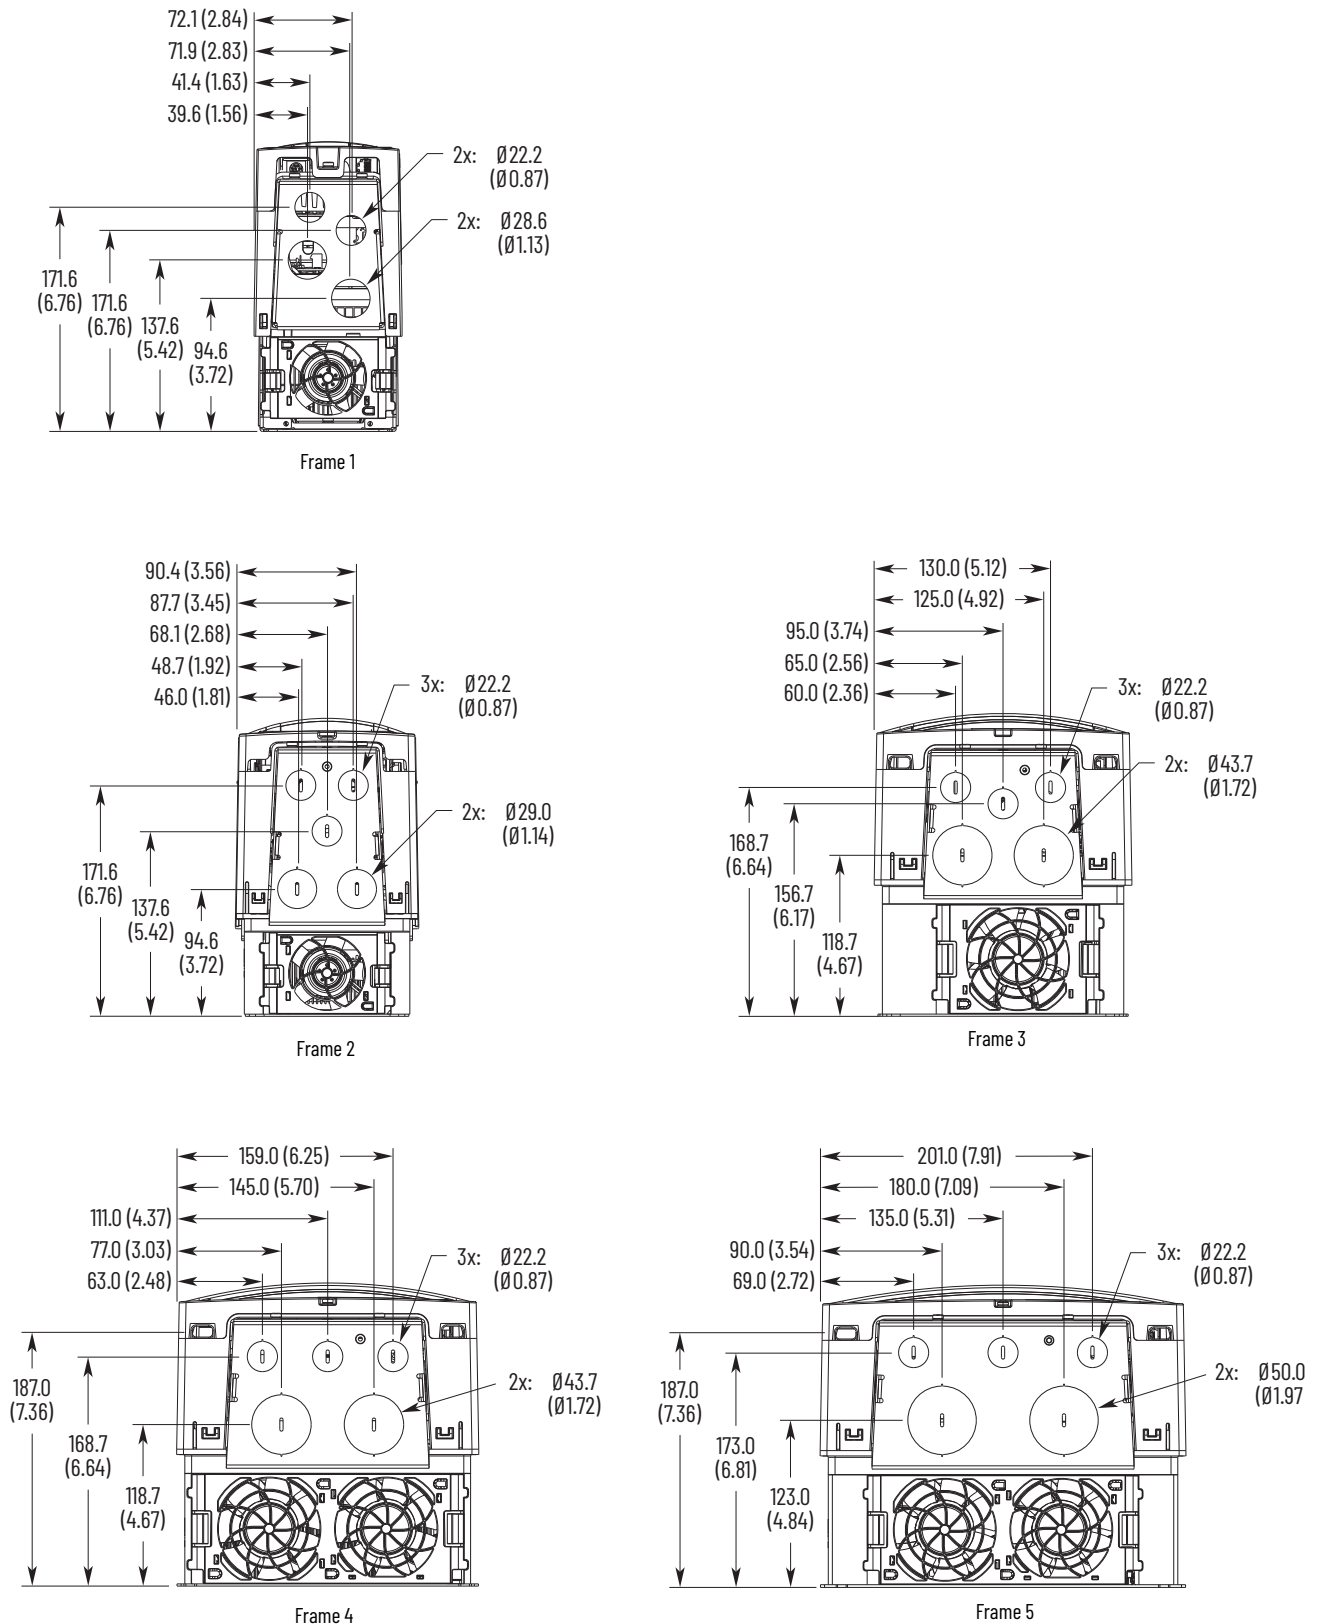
NEMA/UL Type 1 Kit, Wall Mount Frames 1...5 (Frame 4 Shown)
